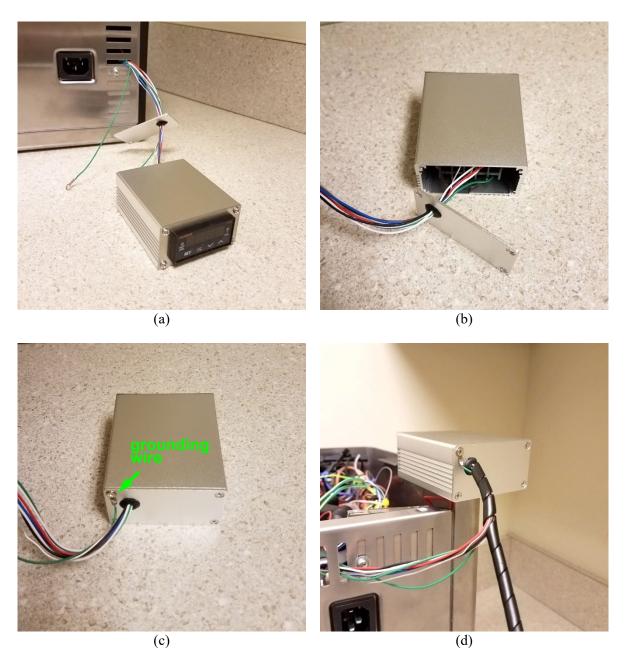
(a) Install the front plate. (b) Gently pull the wires out. (c) Install the back plate and grounding wire. (d) Apply the spiral cut tubing.
